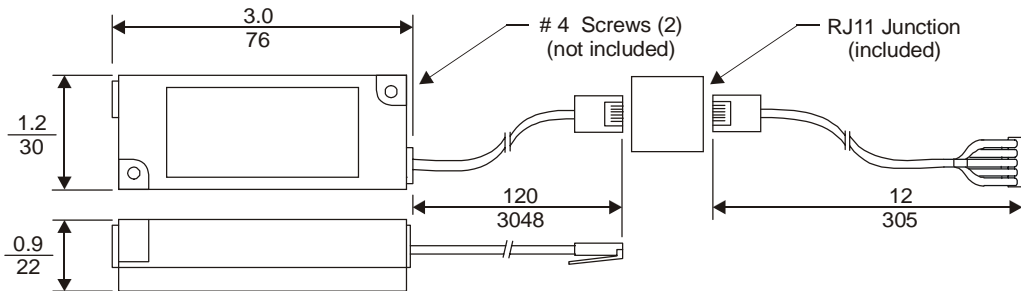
6-Relay Expansion Board Dimensions, in. (mm)
